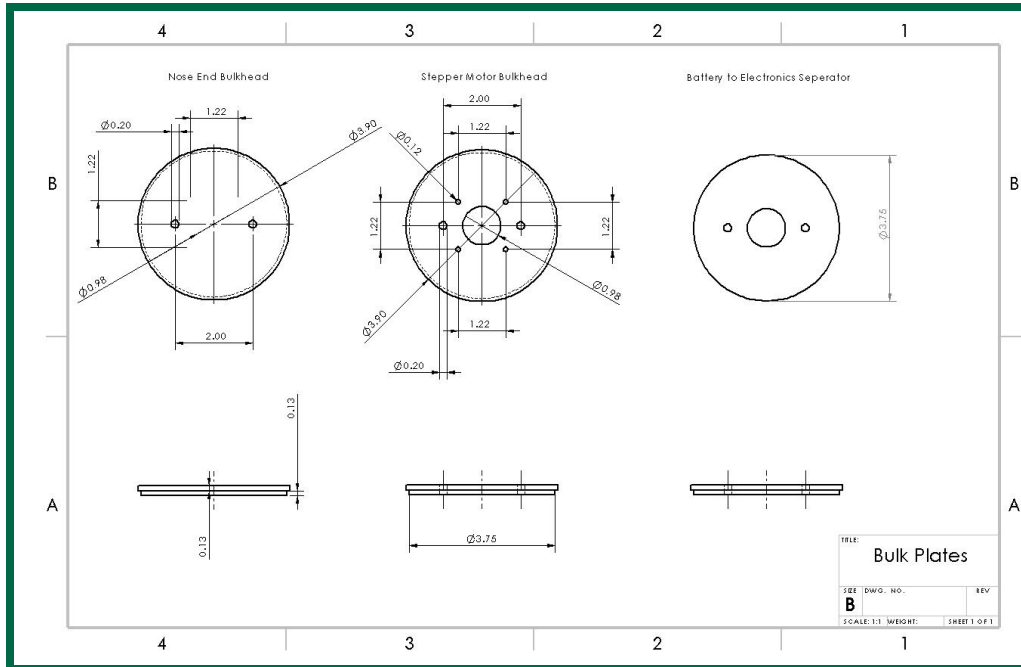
Bulk Plate drawings for Xcarve manufacturing.
